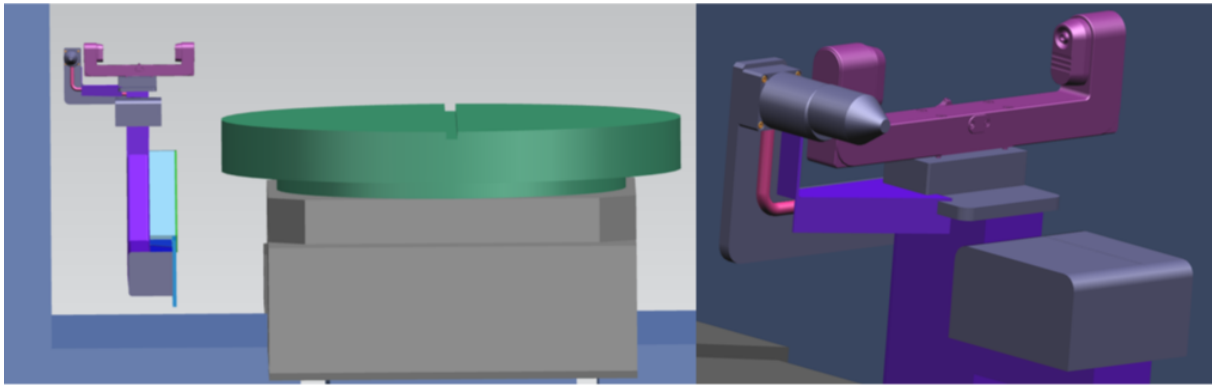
CAD drawing showing placement of the Blum laser and tool probe.
